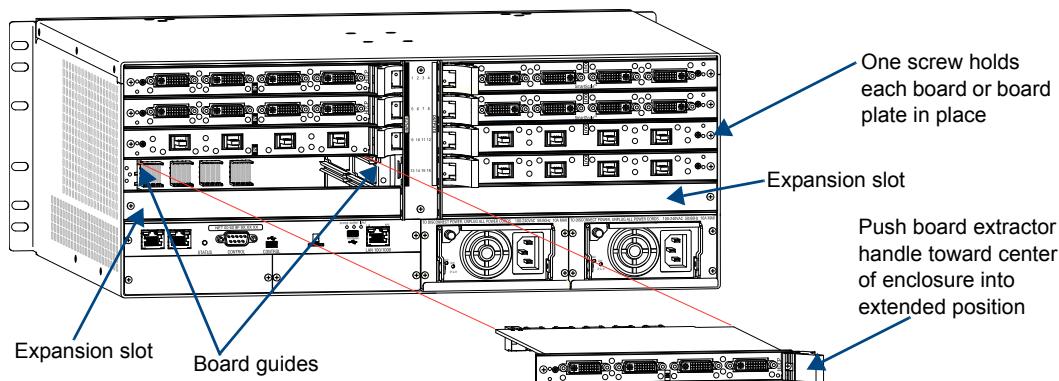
Enova DGX 8 (16/64) - Remove screw, push extractor handle right (input) or left (output), pull board straight out
